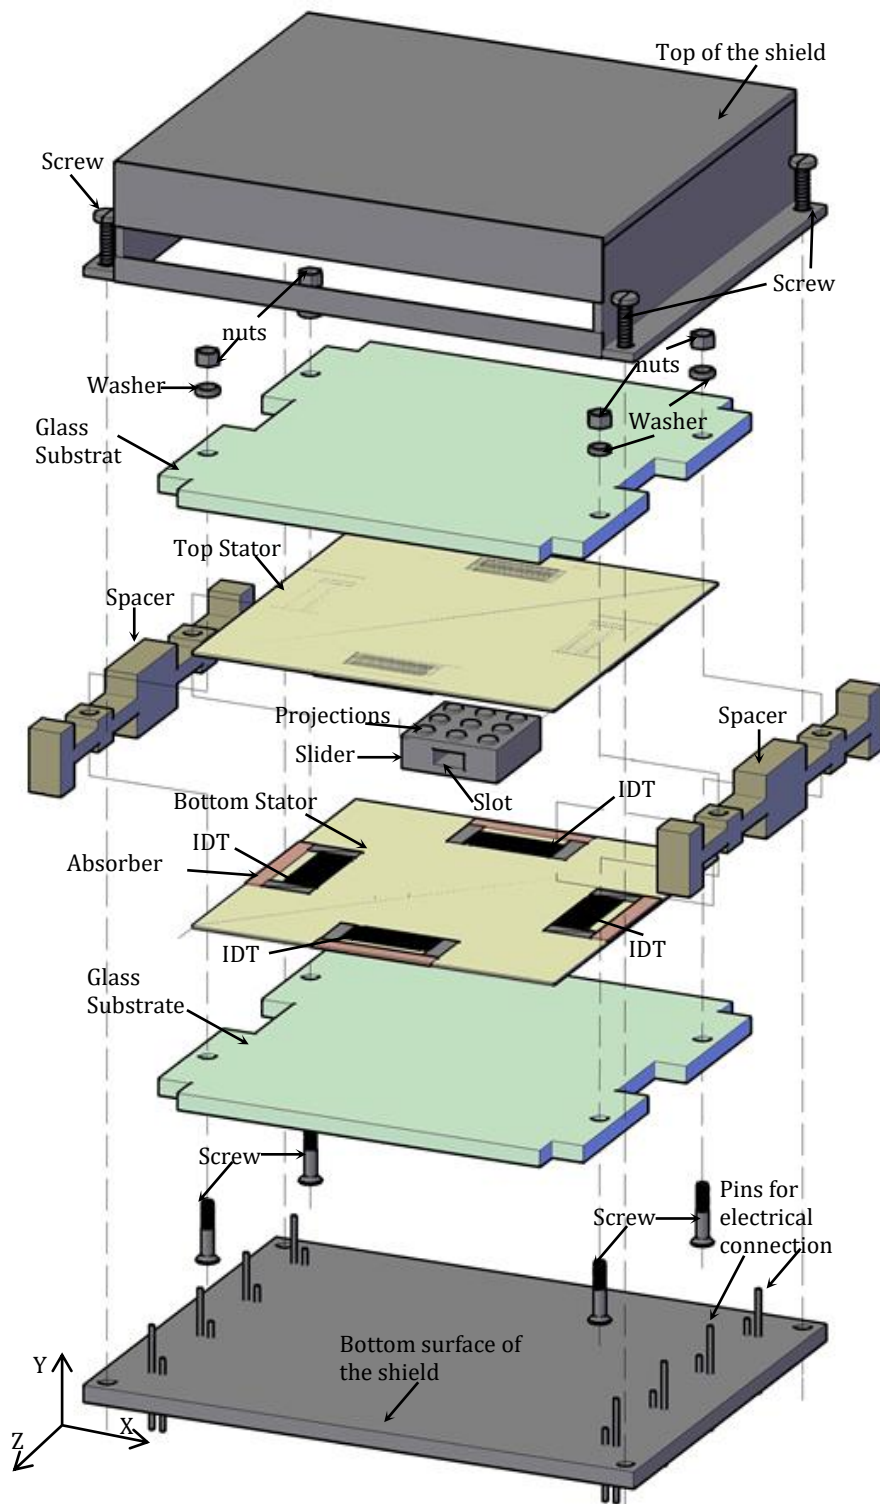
31: Exploded perspective of the DFD SAW linear motor, showing each component making the complete device.
